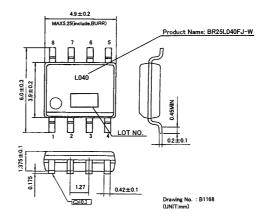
(b) PHYSICAL DIMENSION SOP-J8(BR25L040FJ-W)
